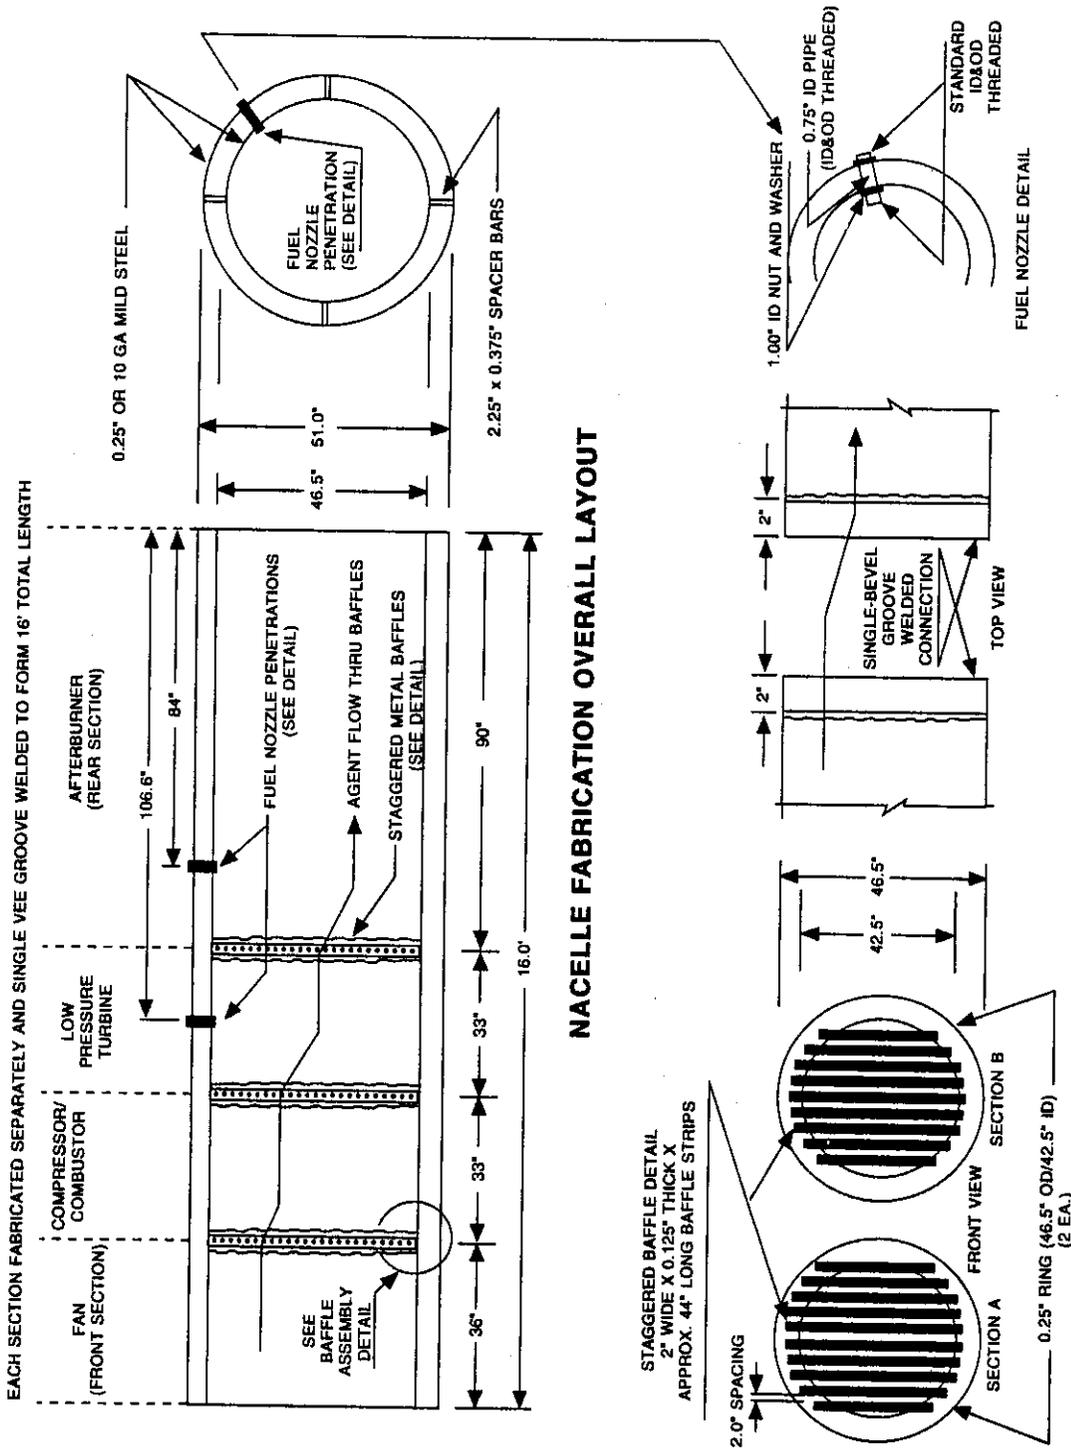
F-100 ENGINE NACELLE TEST APPARATUS FABRICATION DRAWING, PAGE 1 OF 3
